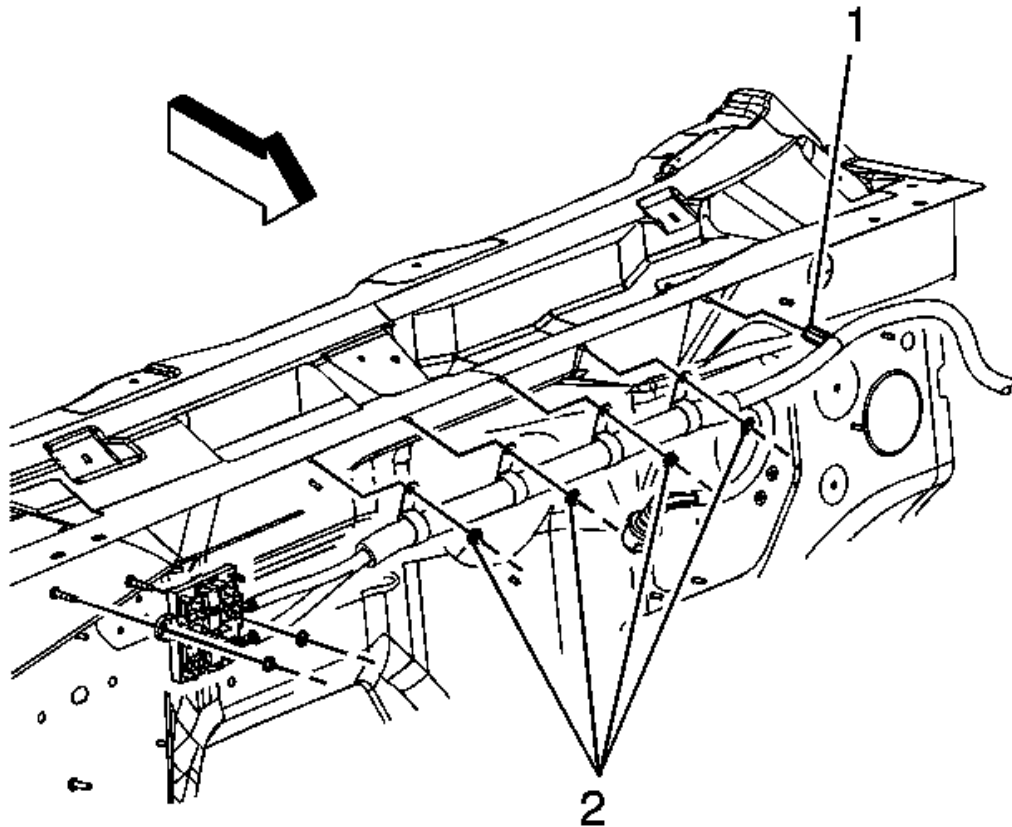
View Of Positive Battery Cable Clip & Nuts
